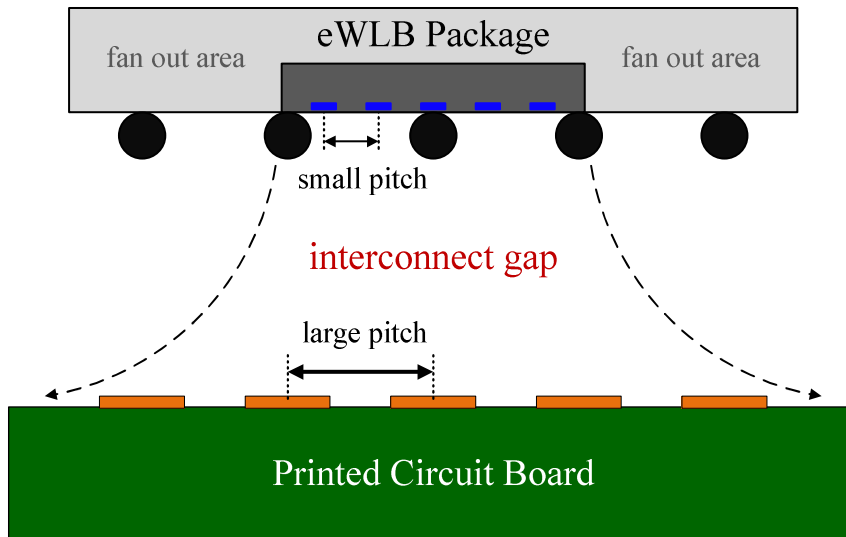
Interconnection gap between package and printed circuit board [2]
